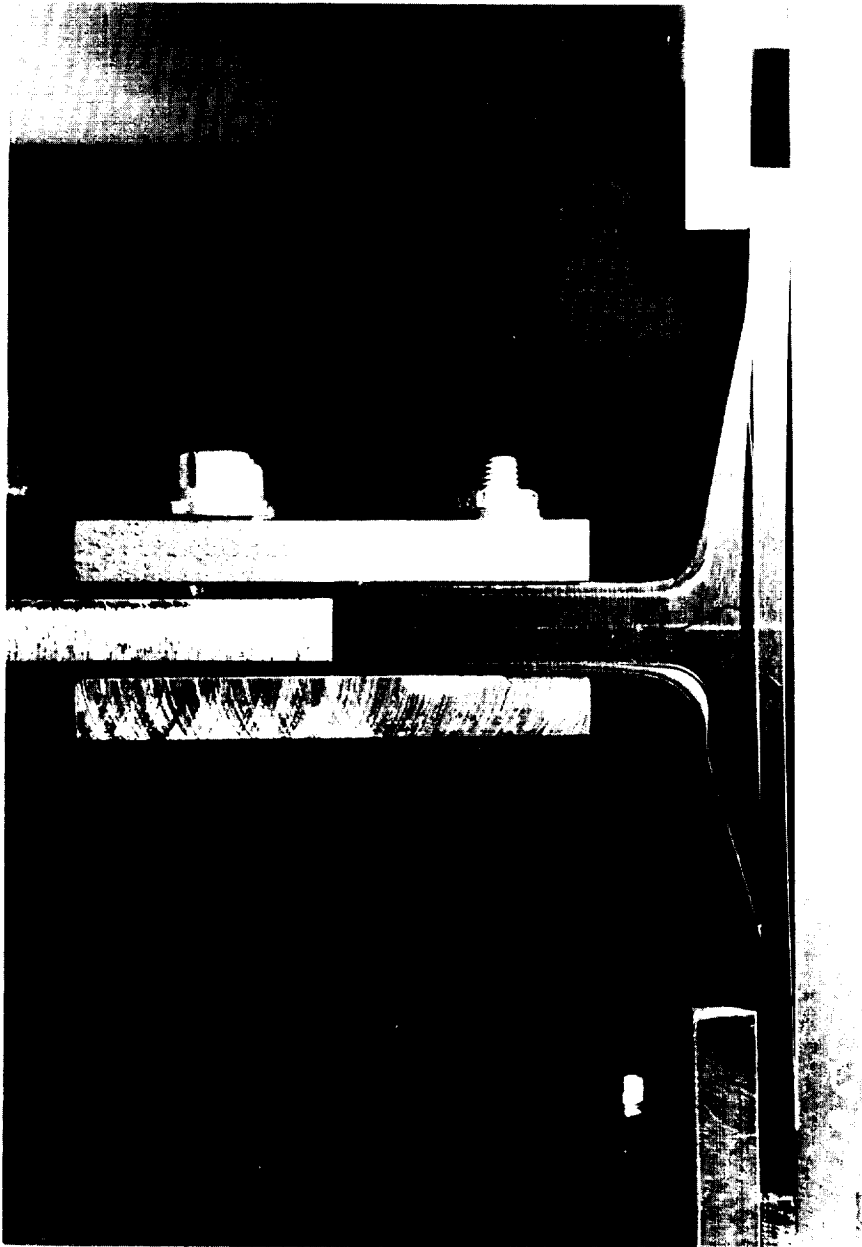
Typical failure of stiffener pull-off specimen (C3). First cracks were in the blade, second around the radius, and lastly horizontal delamination.
